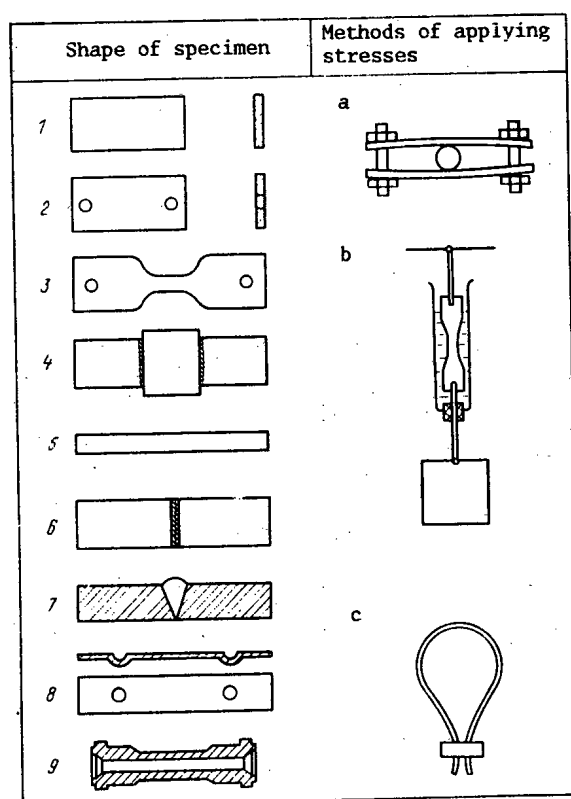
Shapes of specimens for corrosion tests and methods for applying mechanical stresses to them: 1) flat; 2) flat with holes; 3) flat with neck; 4) with welded lap joint; 5) loop-shaped; 6) with welded butt joint; 7) a cut in the weld; 8) with indentations; 9) bushing with neck; a) specimens of shape 2 deformed within the elastic limit; b) specimens of shape 3 in a corrosive medium and subjected to tensile force at the neck (200 MPa); c) specimens of shape 5 deformed within the elastic limit.
